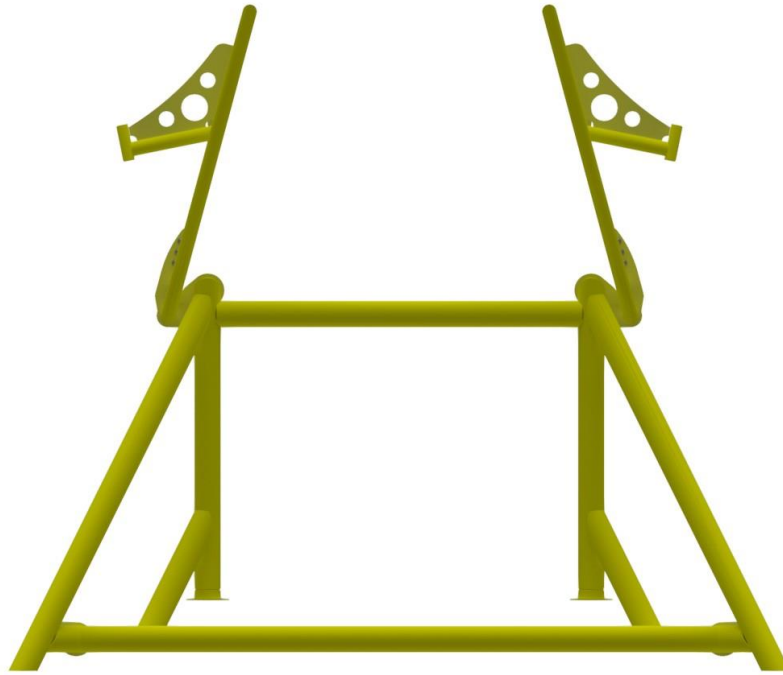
CAD Model - Front Hinge with Hatch Open.
